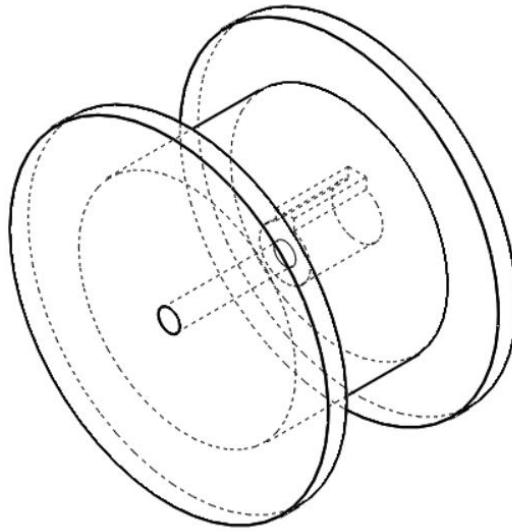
CAD drawing of the custom-made winch drum for the winch actuator
